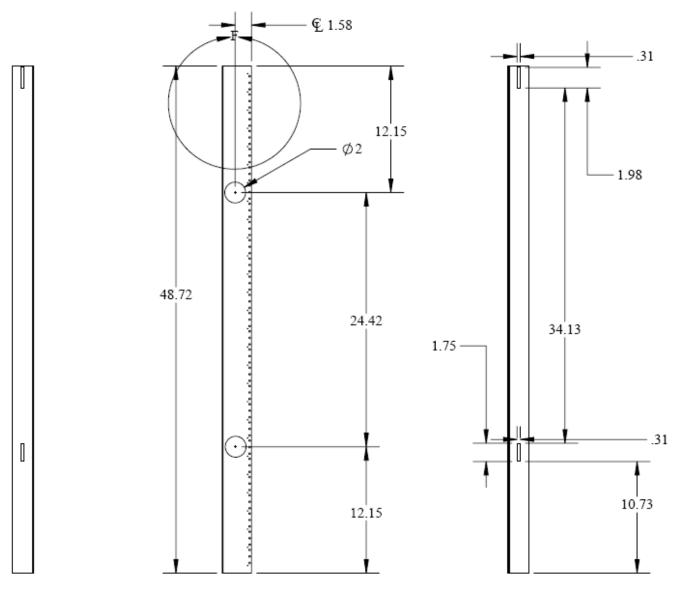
RACK RAIL DETAIL: PLEASE NOTE THAT DETAIL "F" IS ON THE FOLLOWING PAGE.
